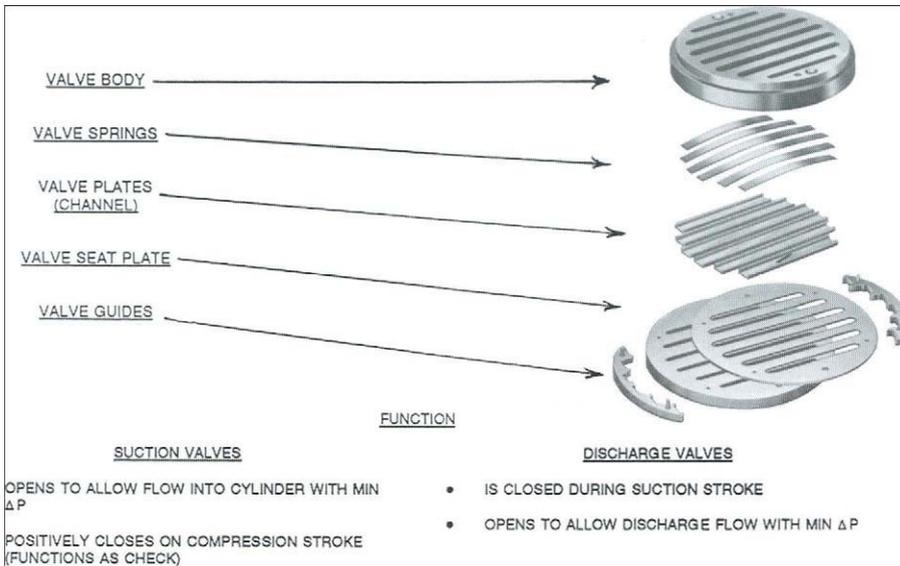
Reciprocating compressor valves – (Channel type, Suction and Discharge) (Courtesy of Dresser Rand)
